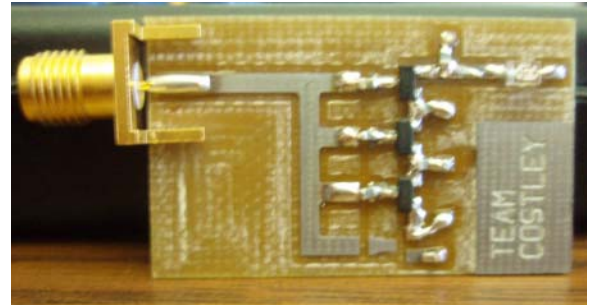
Completed charge pump circuit with three stages assembled and hand-soldered.
